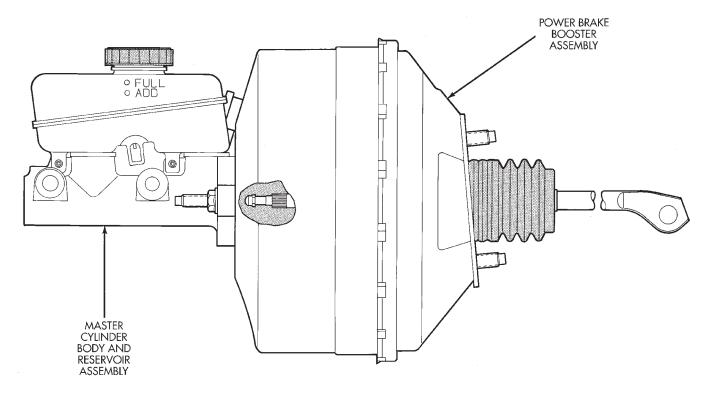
Brake Booster/Master Cylinder Assembly (XJ)
